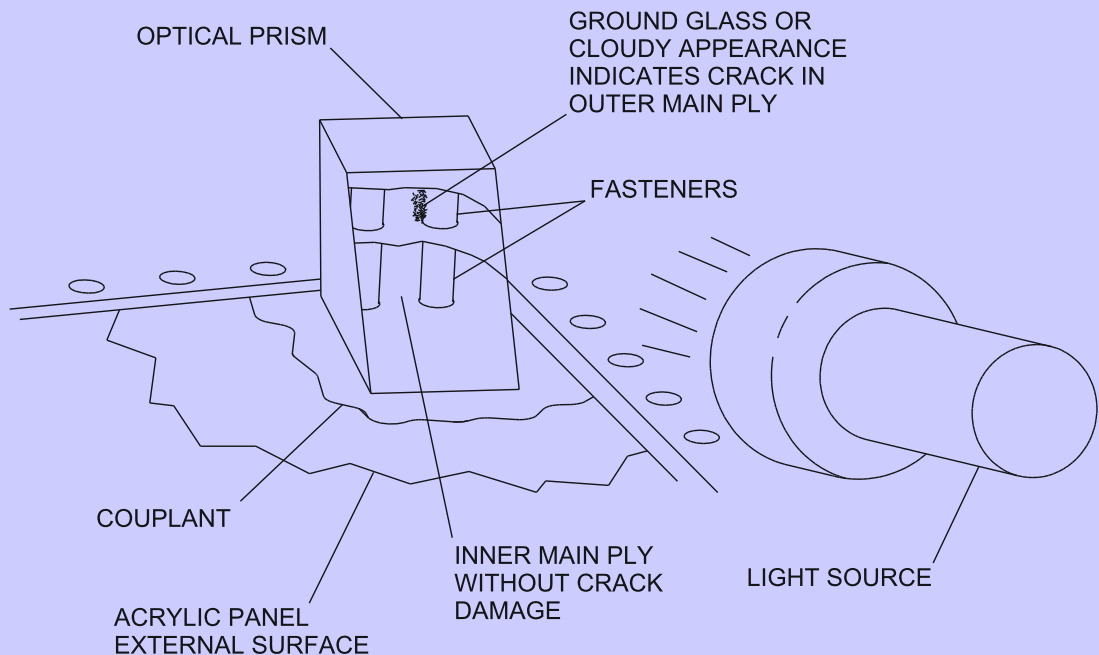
Optical Inspection Using 6580000-1 Prism
